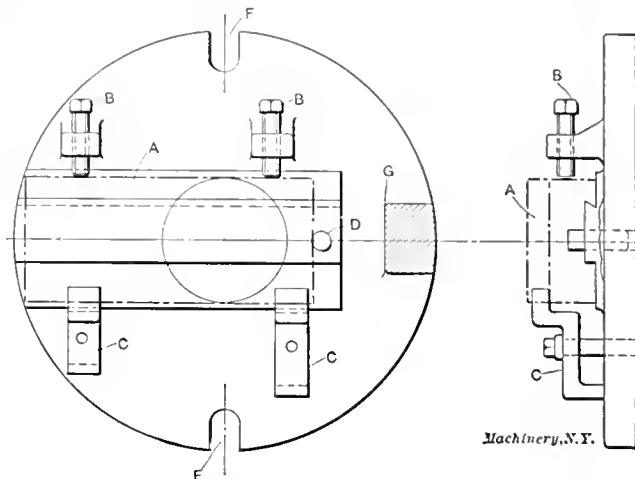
Fixture for Recessing Work shown in Fig. 182.
